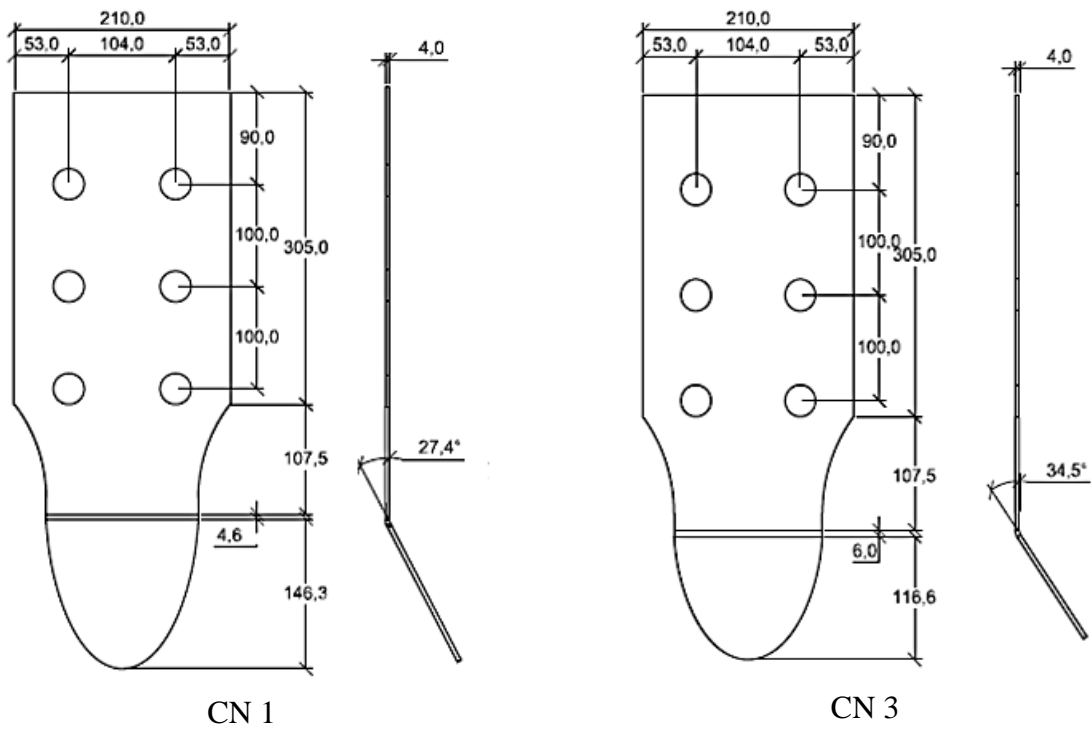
Dimensions of the inclined plates with the connecting plate. Units in millimetres.
